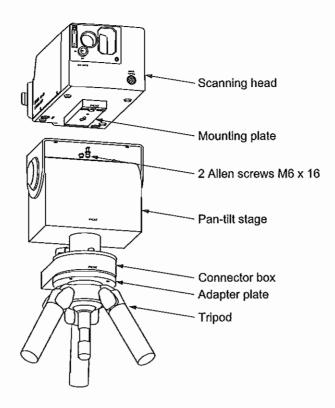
Mounting the scanning head on the pan-tilt stage
